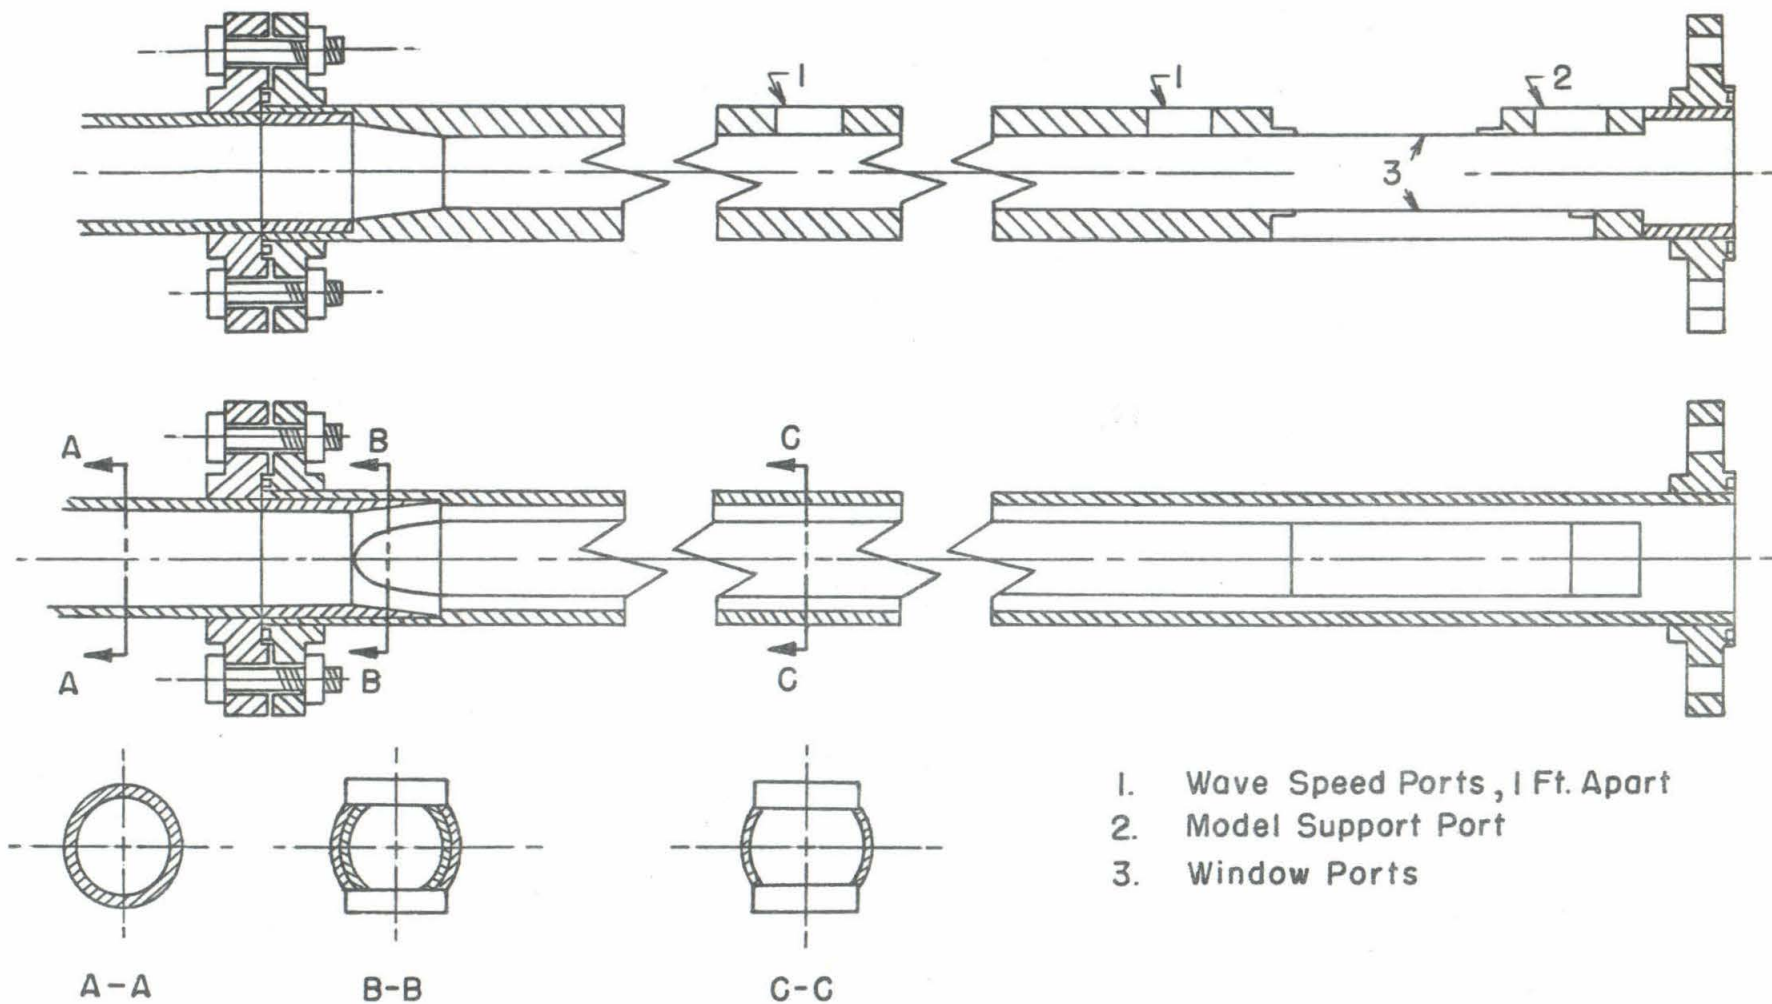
FLAT TOP AND BOTTOM TEST SECTION
